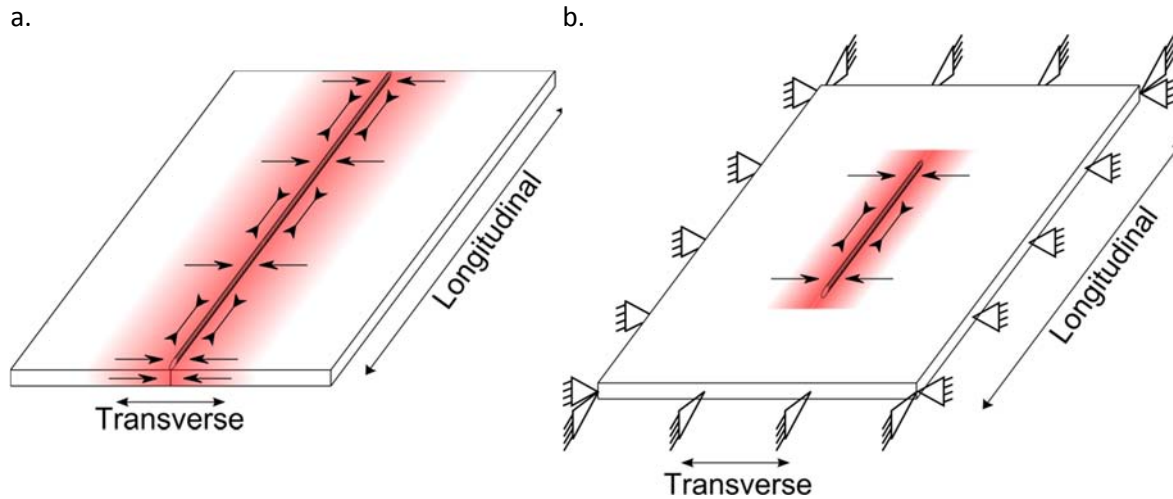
Thermal contraction of material during cooling of linear weld: a. unconstrained butt weld, b. bead-on-plate or repair weld, where the surrounding material or structure provides mechanical constraint.
